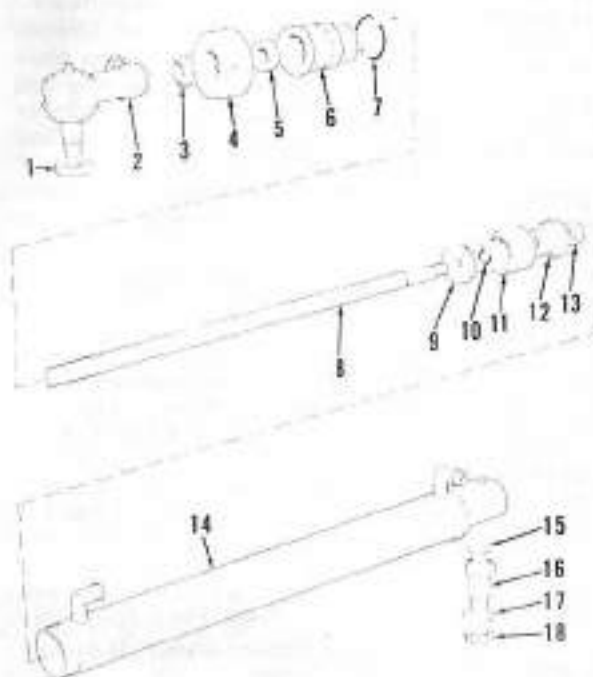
Exploded view of steering cylinder used on 1210 4WD tractor. Cylinder is transversely mounted behind front axle. Also see Figs. 28 and 30.
